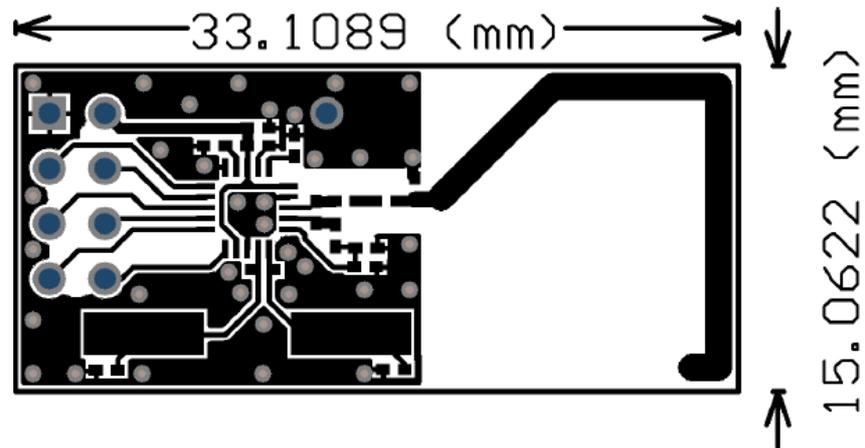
Top layer (nRF24L01+ RF layout with single ended connection to PCB antenna and 0402 size passive components)
